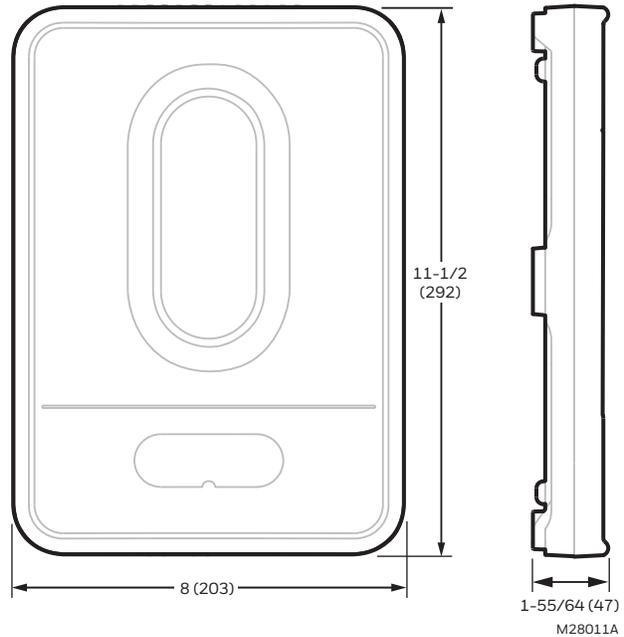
HZ322 TrueZONE panel dimensions in in. (mm).
